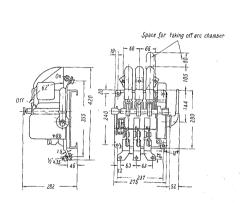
Outline drawing of AC breaker, type RF 921-400
